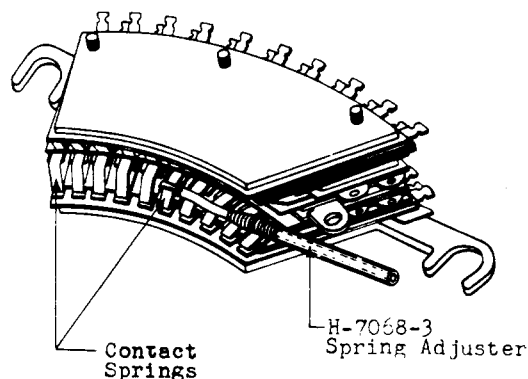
Adjusting for Contact Spring and Bank Contact Clearance
